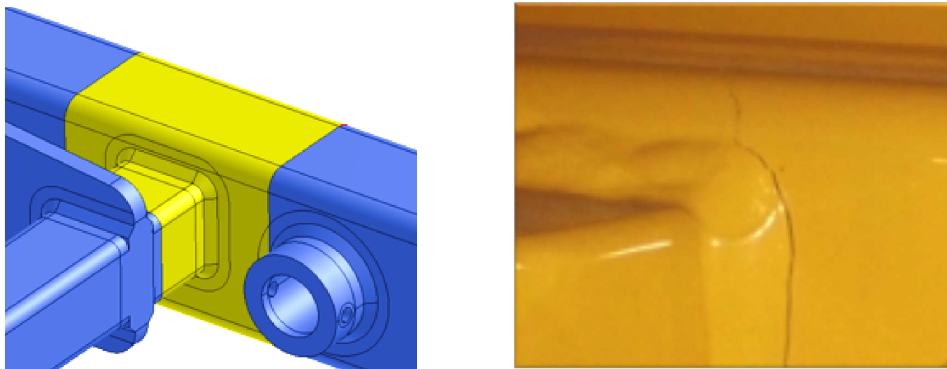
Geometry (left) and failure at the edge of the weld bead (right).
